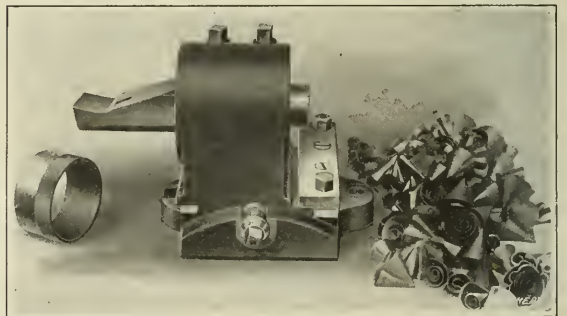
Offset or Set-over Tool and Holder and Chip produced by it
